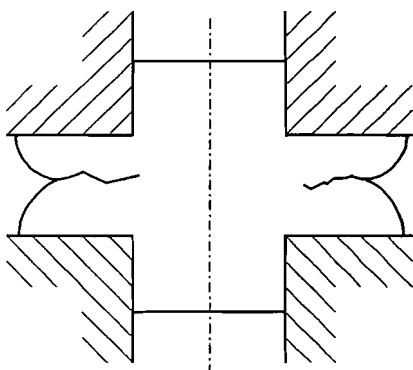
δ -Crack, a crack which occurs at midheight of material in the flange in two direction free extrusion without side constraint.
